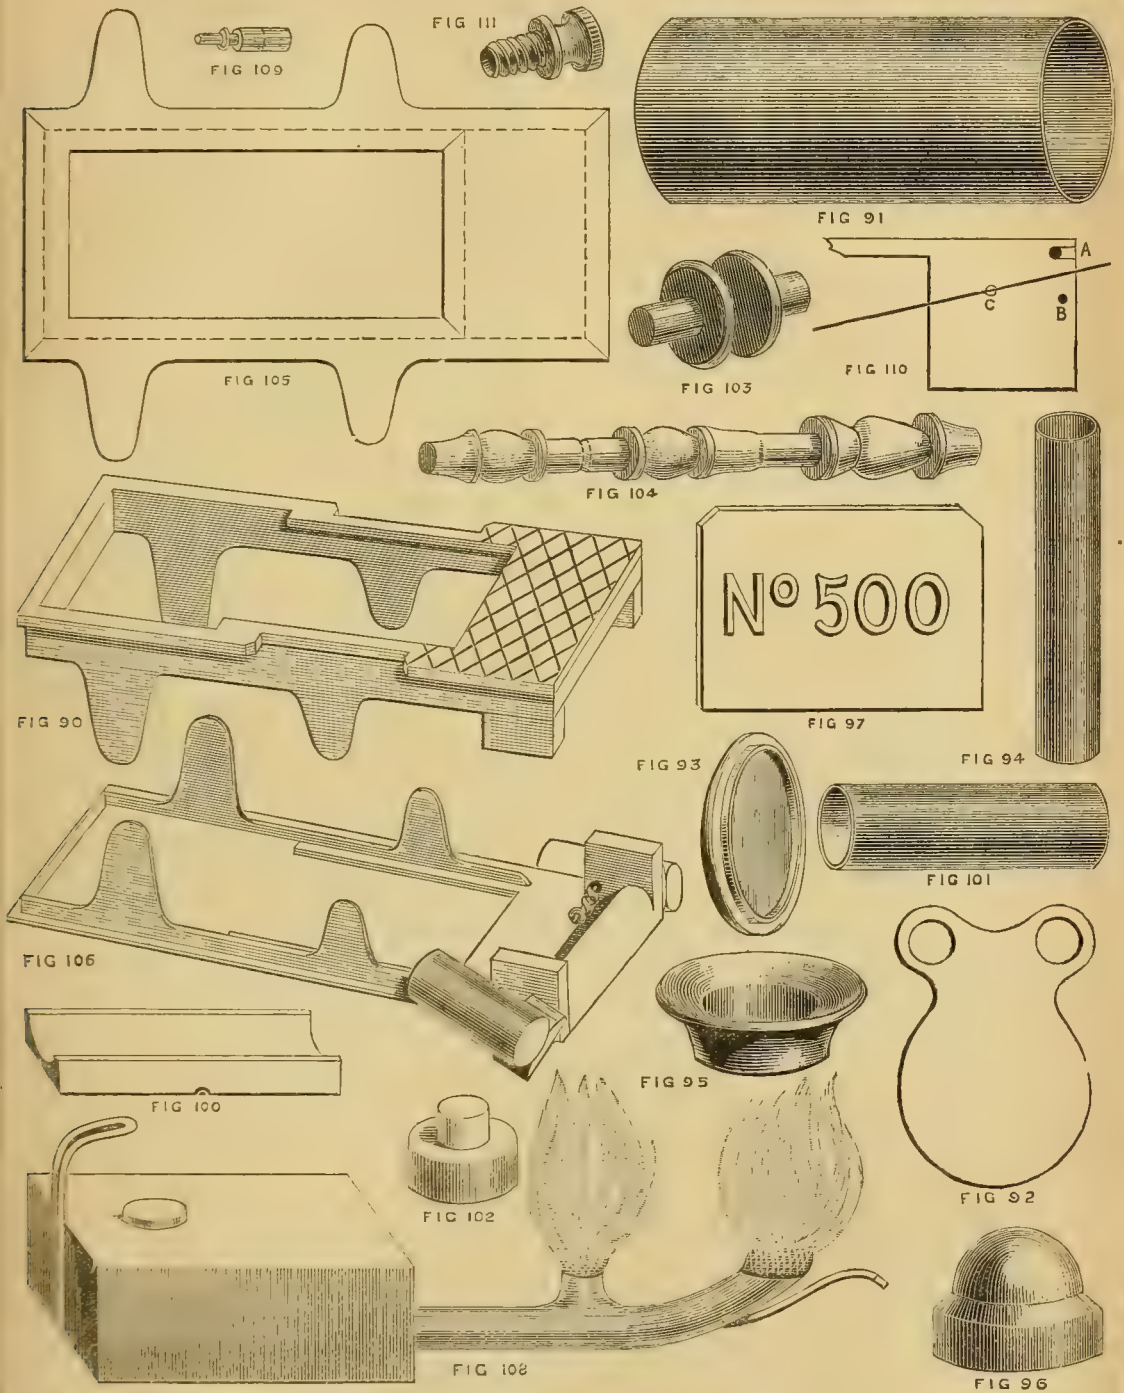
CAST FRAME. FIG. 91.—BOILER TUBE. FIG. 92.—BOILER END. FIG. 93.—BOILER END. FIG. 94.—CHIMNEY. FIG. 95.—CHIMNEY TOP. FIG. 96.—STEAM DOME. FIG. 97.—NUMBER PLATE. FIG. 100.—CYLINDER BLOCKS. FIG. 101.—CYLINDER TUBE. FIG. 102.—CYLINDER COVER. FIG. 103.—BUFFERS. FIG. 104.—STEAM AND GAUGE TAPS AND STEAM WHISTLE. FIG. 105.—ALTERNATIVE FRAME. FIG. 106.—UNDER SIDE OF FRAME WITH CYLINDERS FITTED. FIG. 108.—LAMP. FIG. 109.—PISTON ROD HEAD. FIG. 110.—STEAM BLOCK—A, Exhaust; B, Steam Way; C, Hole for Cylinder. FIG. III.—MAN-HOLE SCREW.
